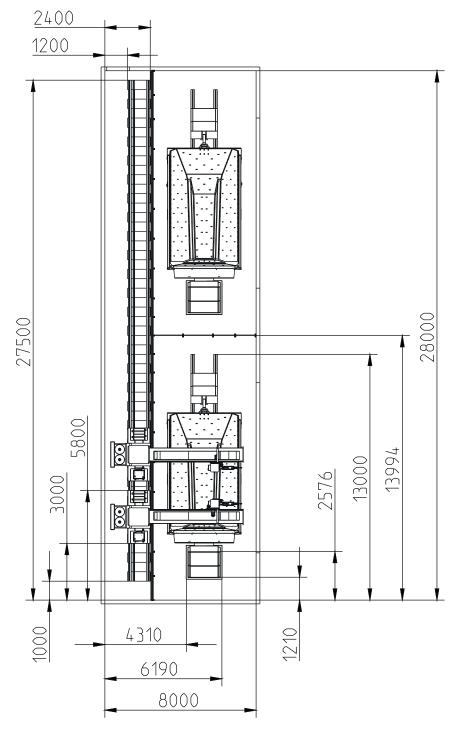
Top view dimensional drawing, all dimensions in millimetres.
